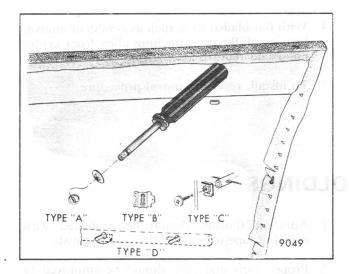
Door Trim Pad Molding and Applique Removal
